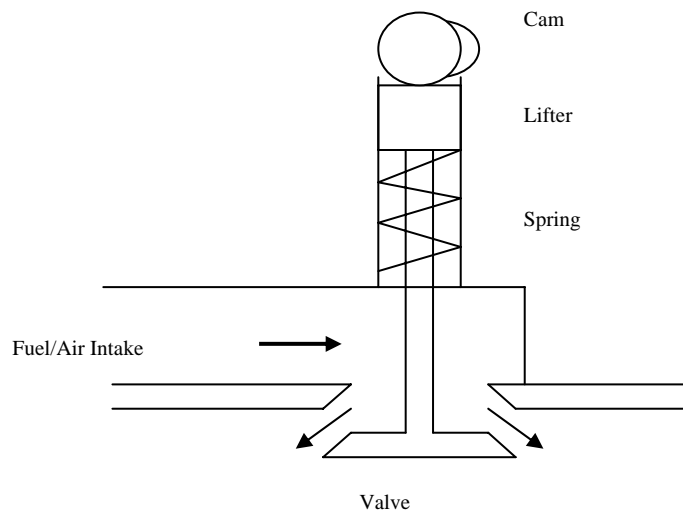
Cam Driven Intake Valve Operation. The PDE thrust tube receives the mixture below the valve.
